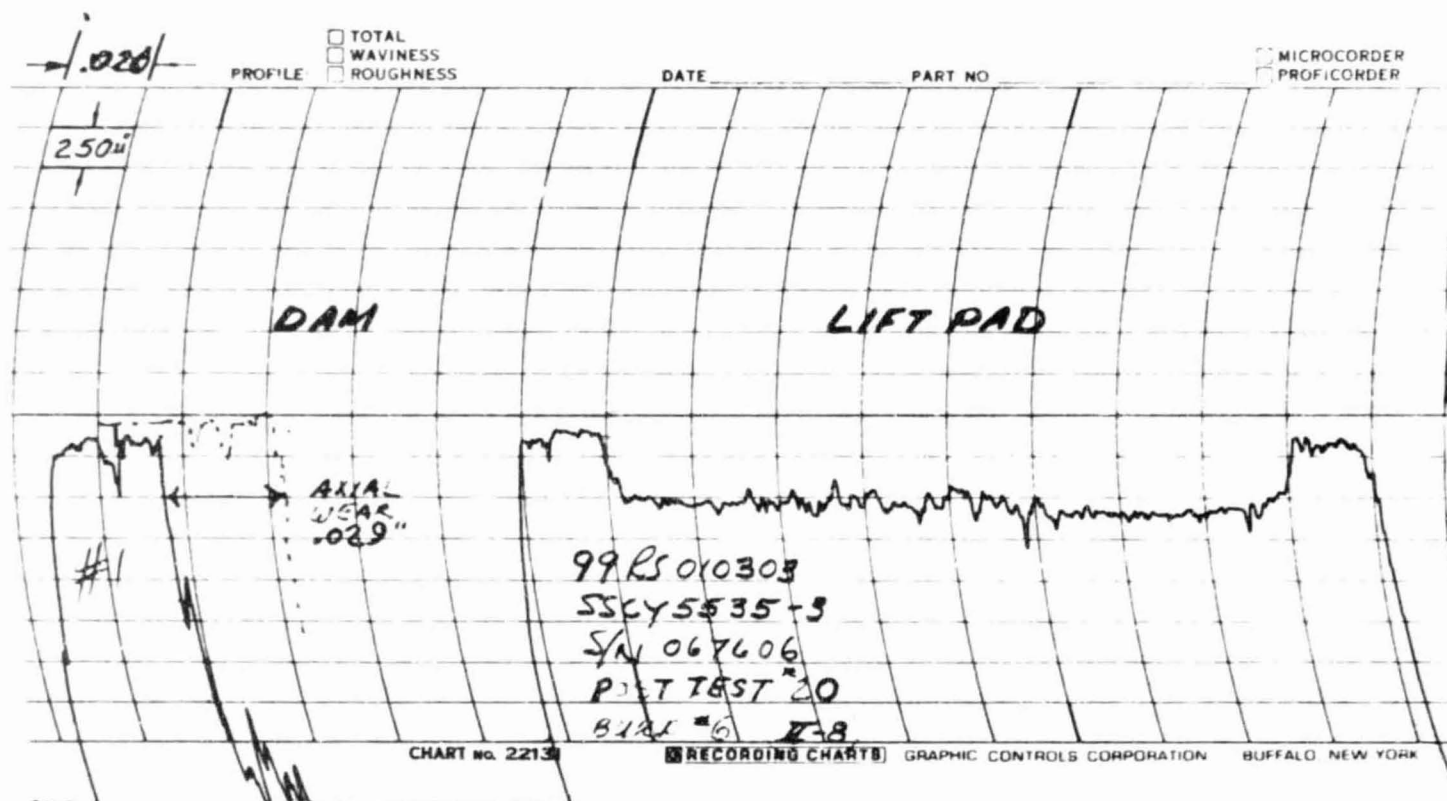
Surface Profile Trace Turbine End Primary Seal
